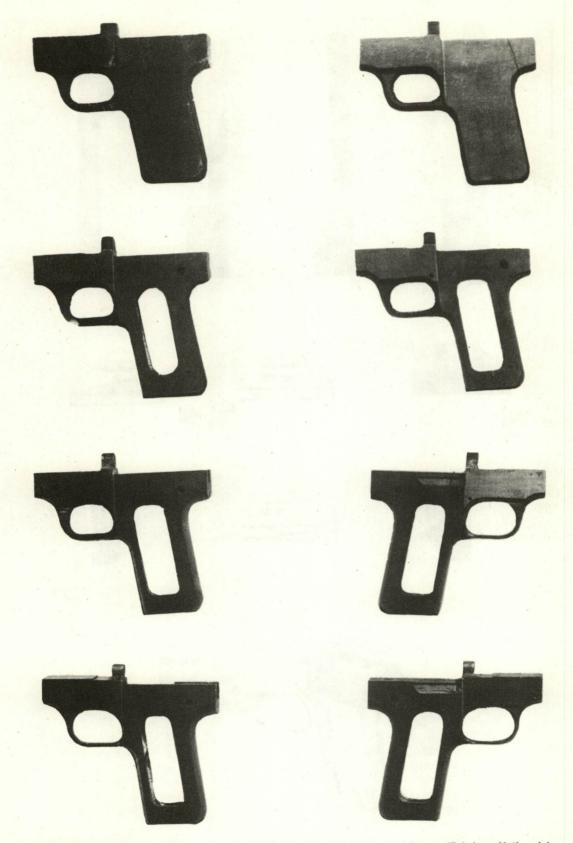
Eight stages in the machining of the Modèle 1900 pistol frame. (Fabrique Nationale)
